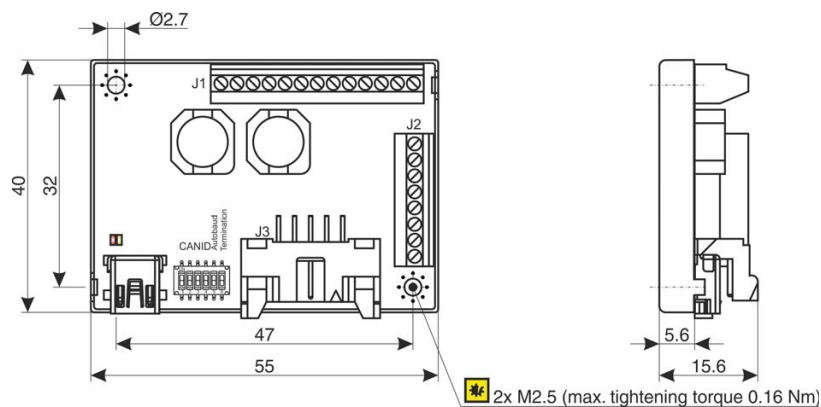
Dimensional Drawing [mm] – DC (390438)
